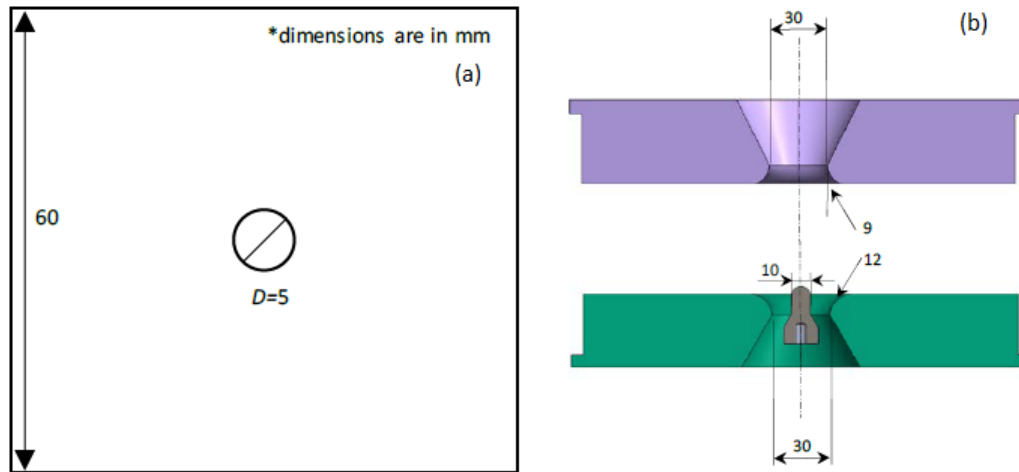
Conical hole expansion test: (a) geometry of the specimen; (b) Schematic of the toolset. All dimensions are in millimeters. The conical punch head has an angle of 60 degrees with a truncated tip with a diameter of 3 mm and a base diameter of 20 mm [9].
